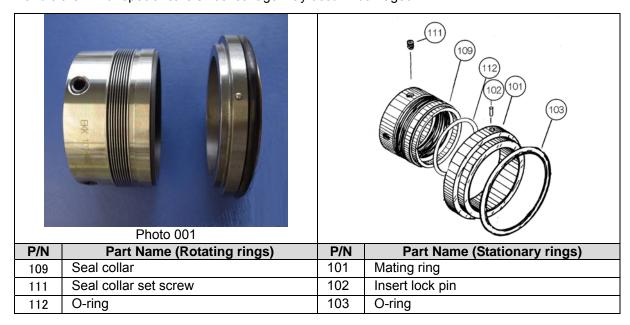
Details of BBSE Type Mechanical Seal Assembly
